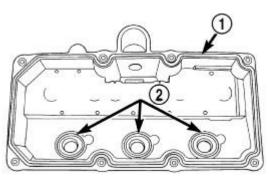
Camshaft, Rocker Arm Assembly & Cylinder Head Courtesy of CHRYSLER LLC
